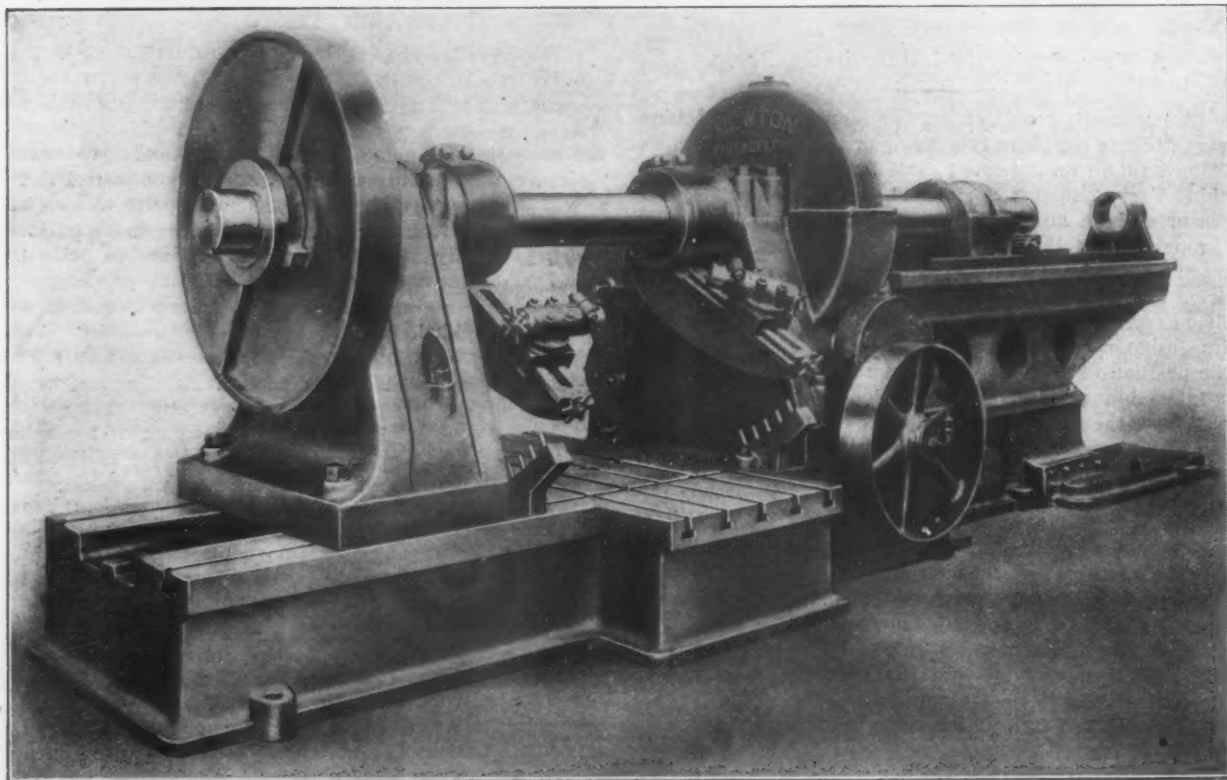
A Rear View of the Newton No. 3 Cylinder Boring Machine.
